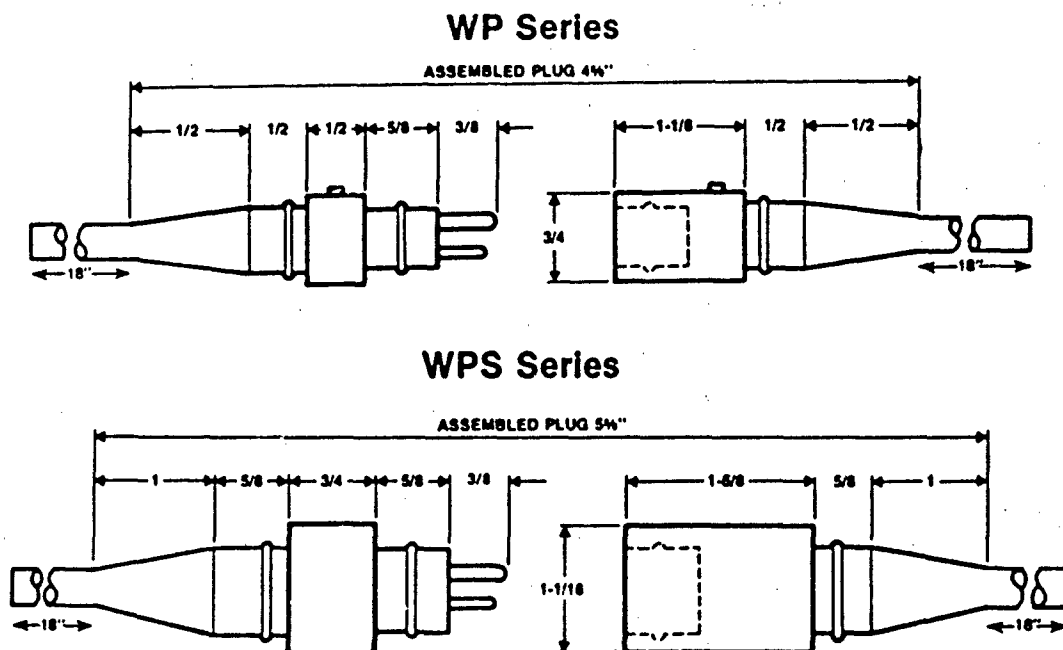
Crouse-Hinds Electro Water-Proof Connectors to provide positive retention.
